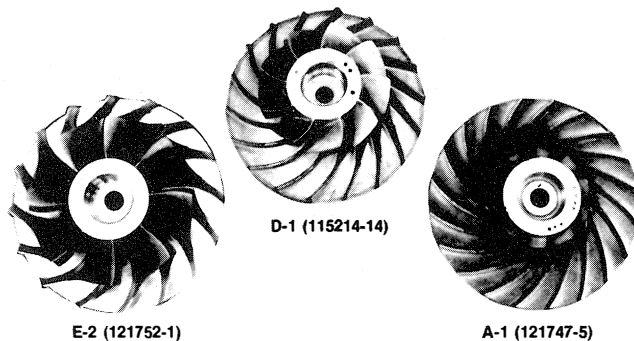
Solar Centrifugal Compressor Impellers Which Form a Family for Various Design Requirements. Rodgers (6)
